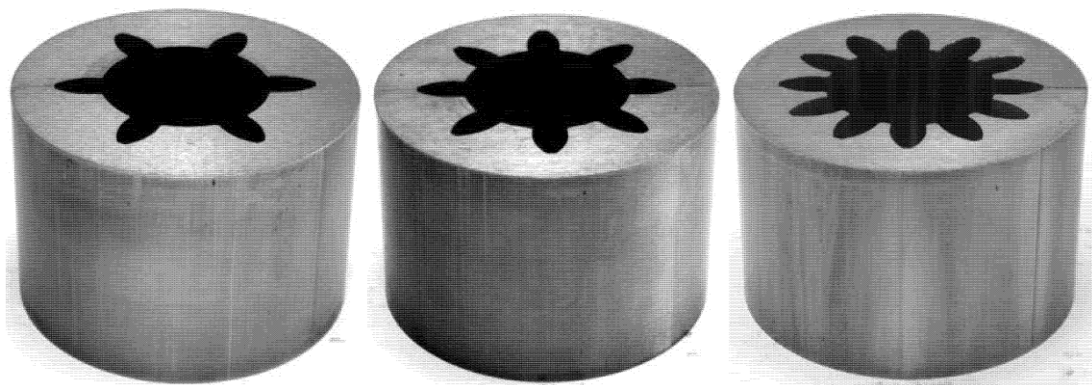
6-, 8-, 12- tooth gears forging dies
